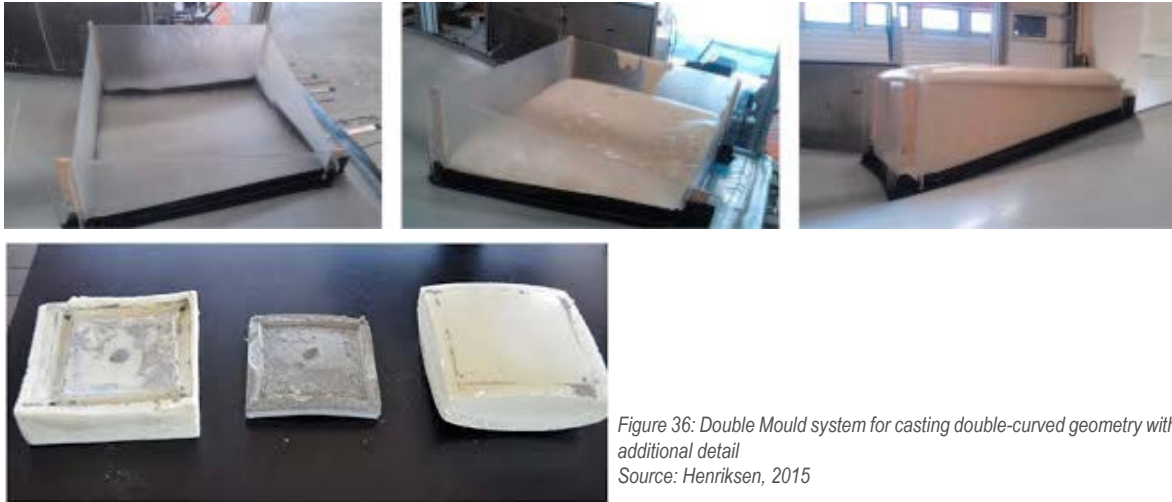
Double Mould system for casting double-curved geometry with additional detail
